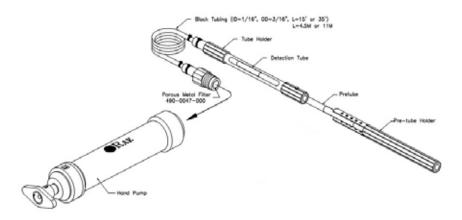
Installation of the remote sampling probe into the LP-1200 hand pump.
